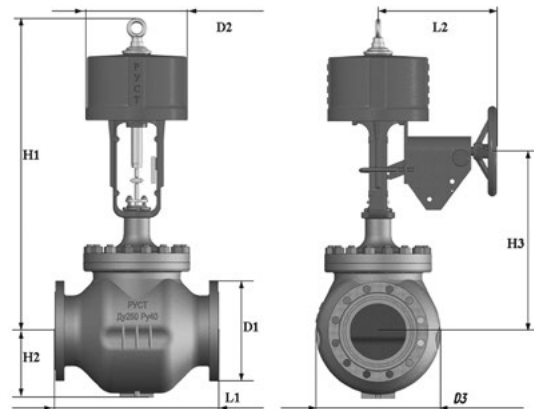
Overall and connection dimensions of 300, 400, 500 series Roost® valves with a piston pneumatic actuator
